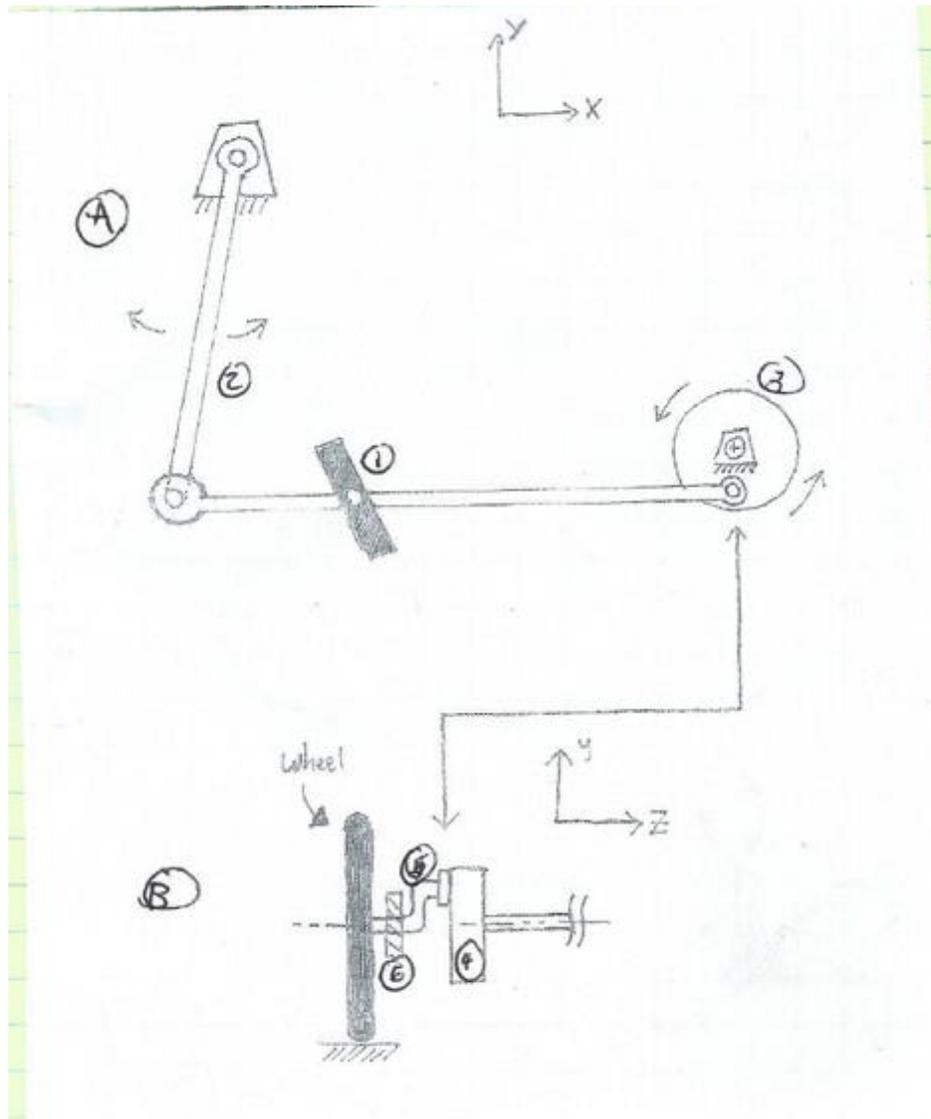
Push Pedal Design Sketch, A: Side View of Four Bar Mechanism; B: Front View
